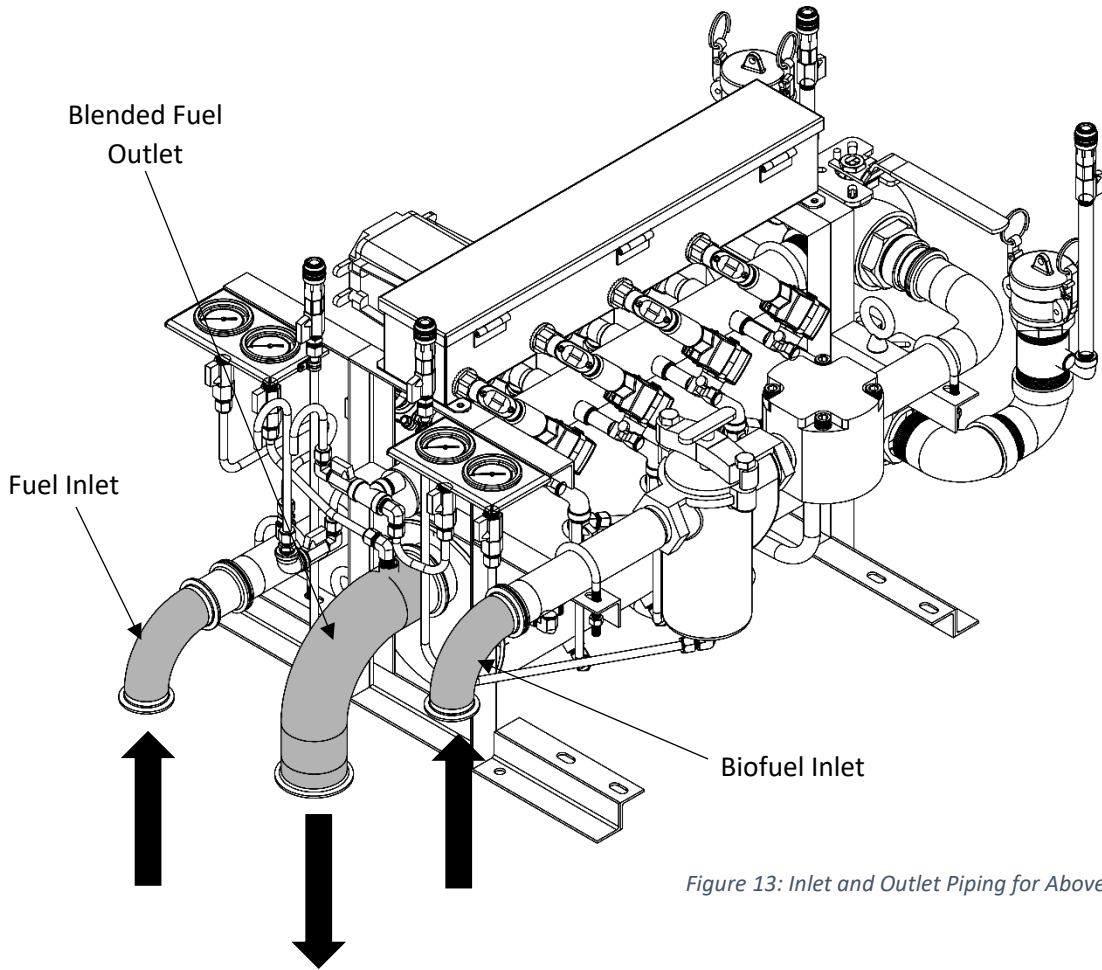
Inlet and Outlet Piping for Aboveground Setup
